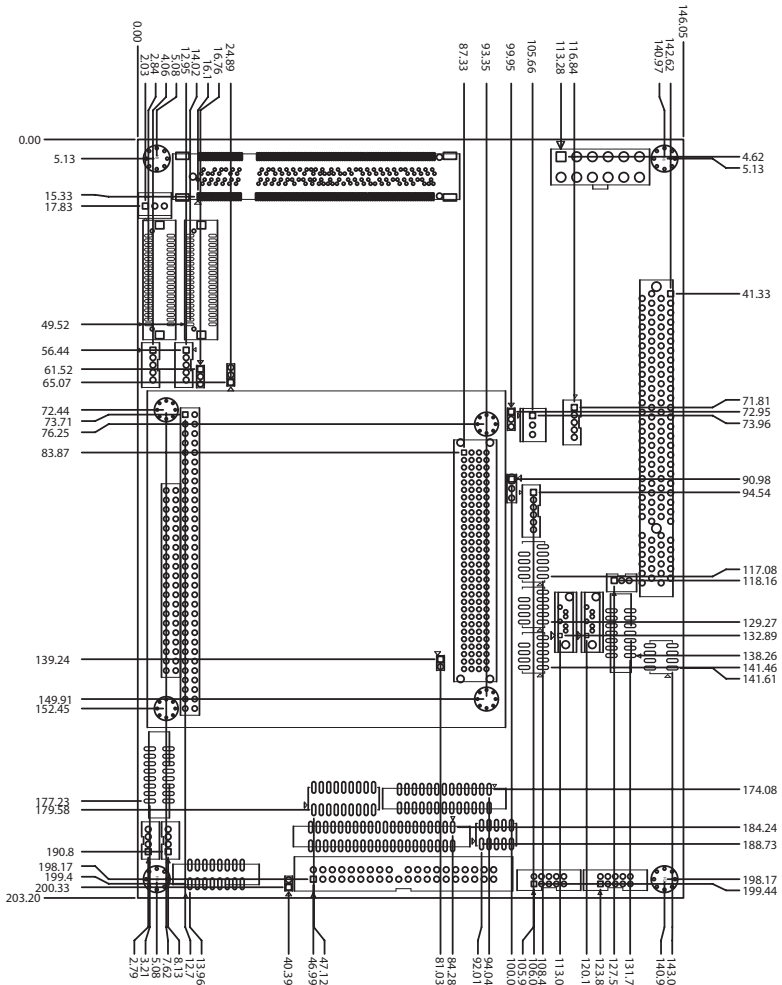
PCM-9584 Mechanical Drawing (component side)
